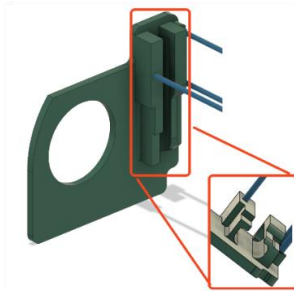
Pin-in-channel retraction mechanism. The face panel protrusions form a central channel through which the S-arm tip passes during extension. On retraction, the metal pin engages the closed end of the channel, drawing the face panel flush with the module body.
